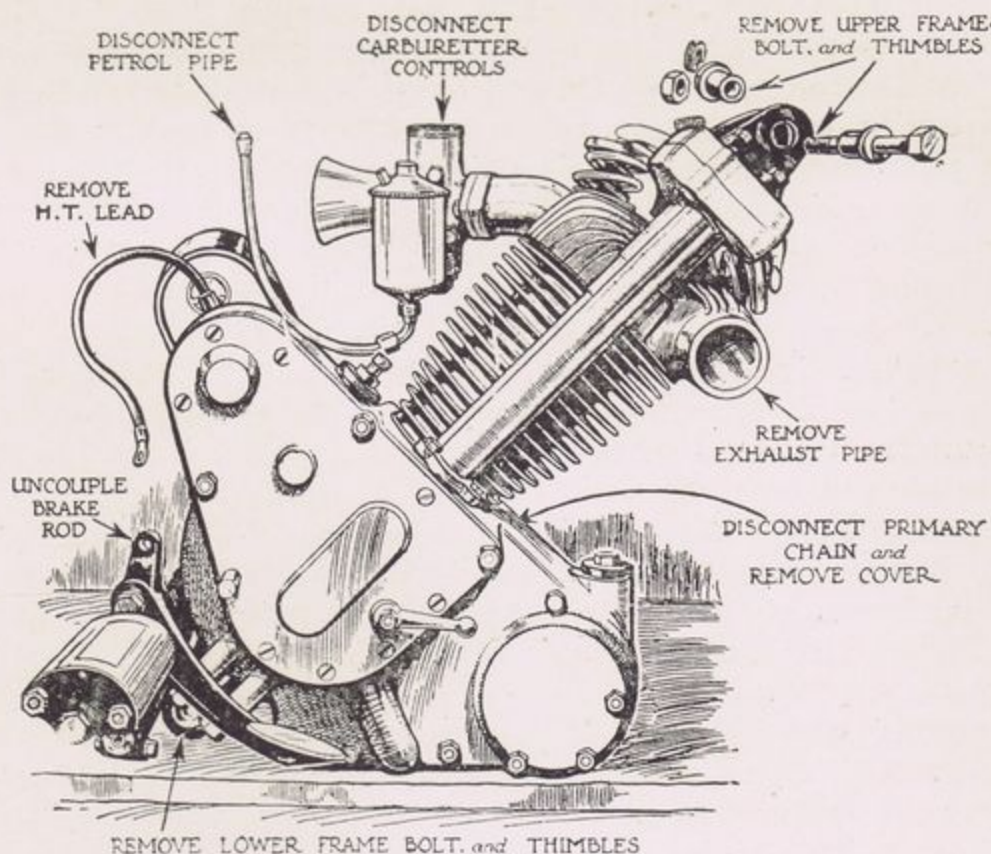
HOW TO REMOVE STANDARD O.H.V. ENGINE FROM THE FRAME
